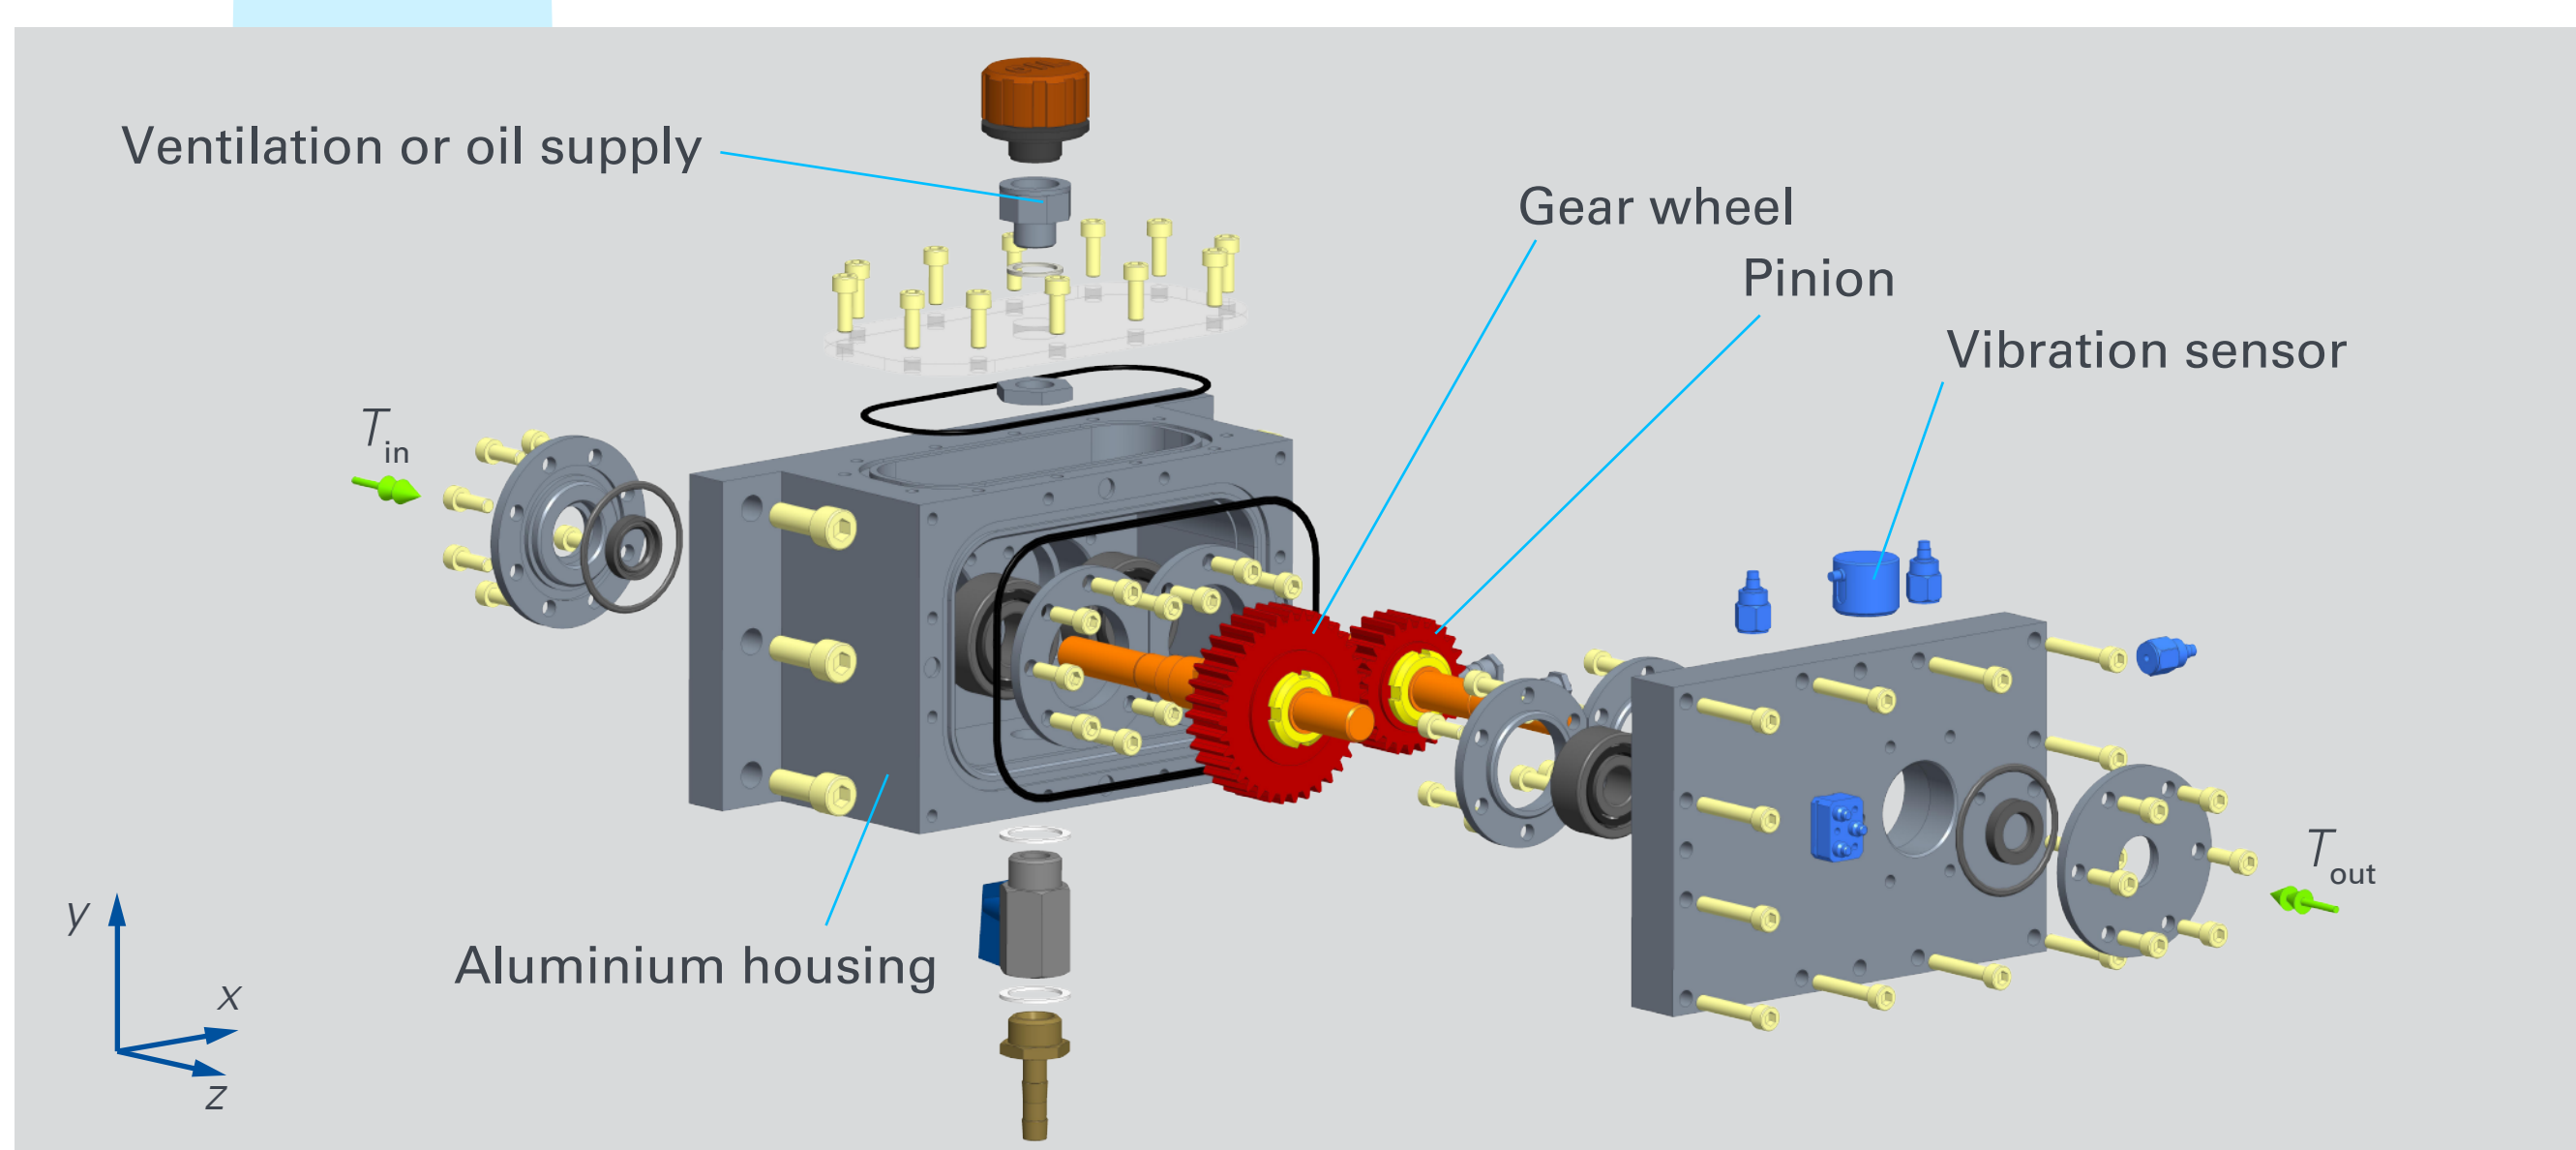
Test gearbox: single stage spur gearbox, tested on a load test bench with two electric motors. Equipped with vibration sensors (blue) and manufactured pitting damage on the pinion. Gear ratio 36/25.
